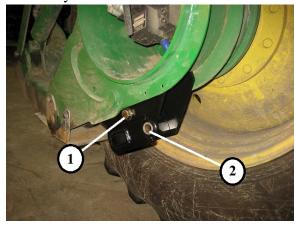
Front Belt Frame Support Key 1 – Bolt ¾"x5½" Grade 8 Key 2 – Swivel
